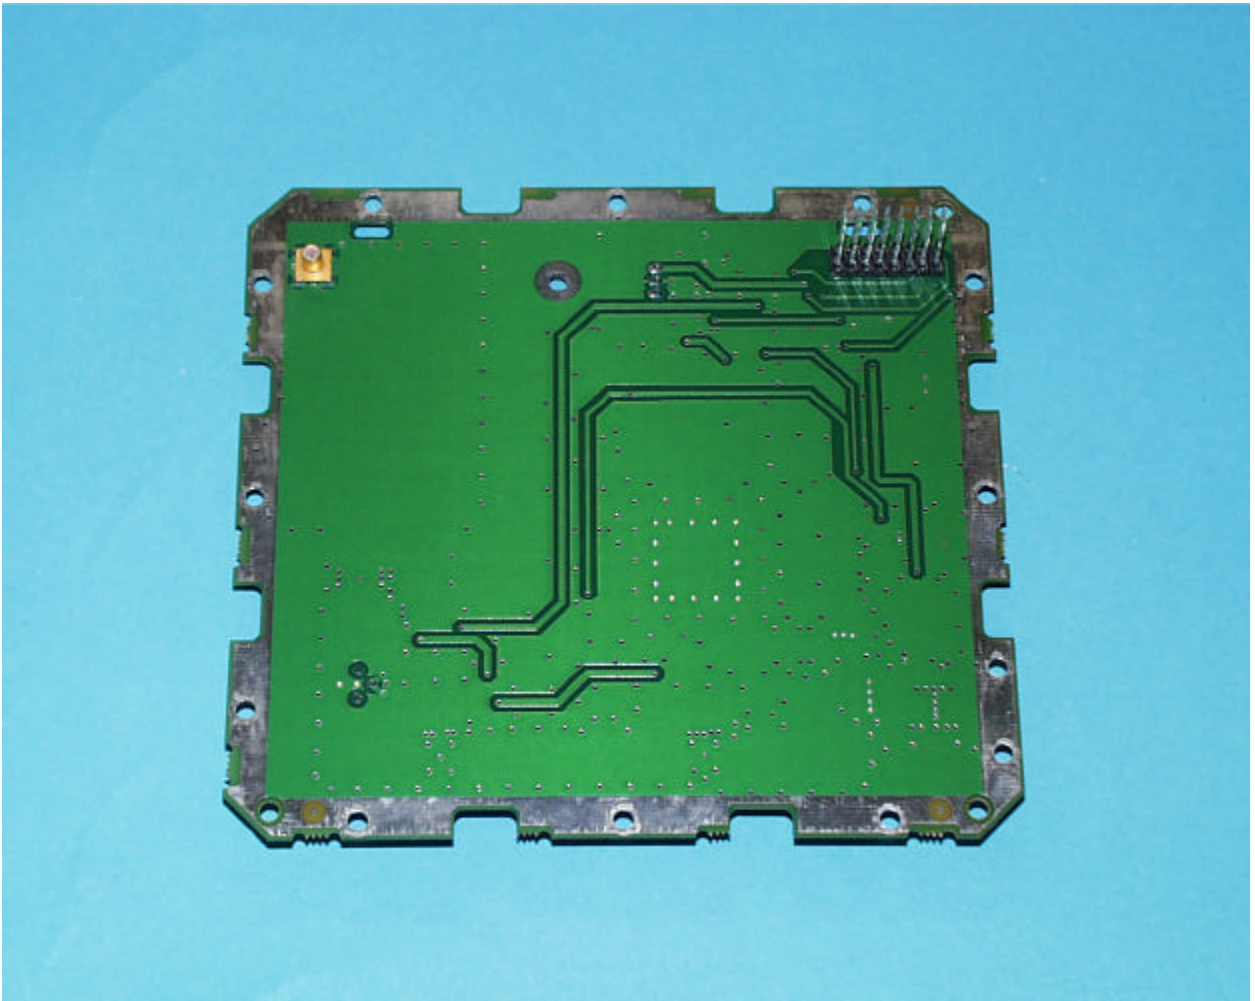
RF Assembly TX/RX PCB Bottom View
